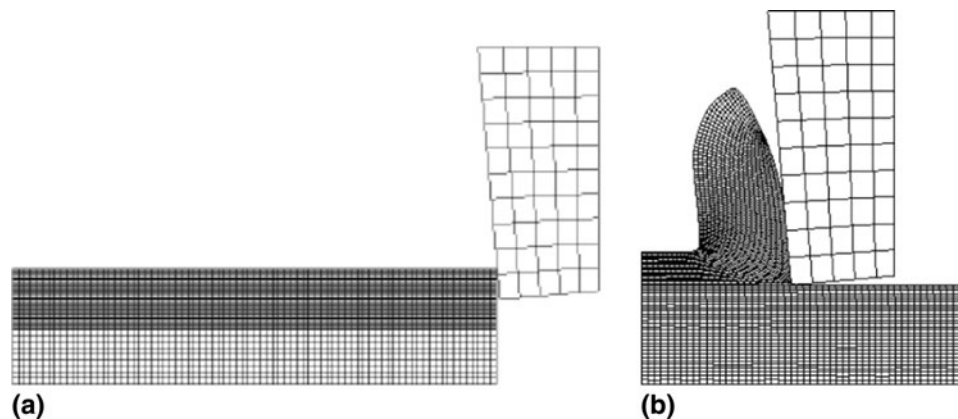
Undeformed (a) and deformed (b) mesh of the workpiece and the cutting tool
